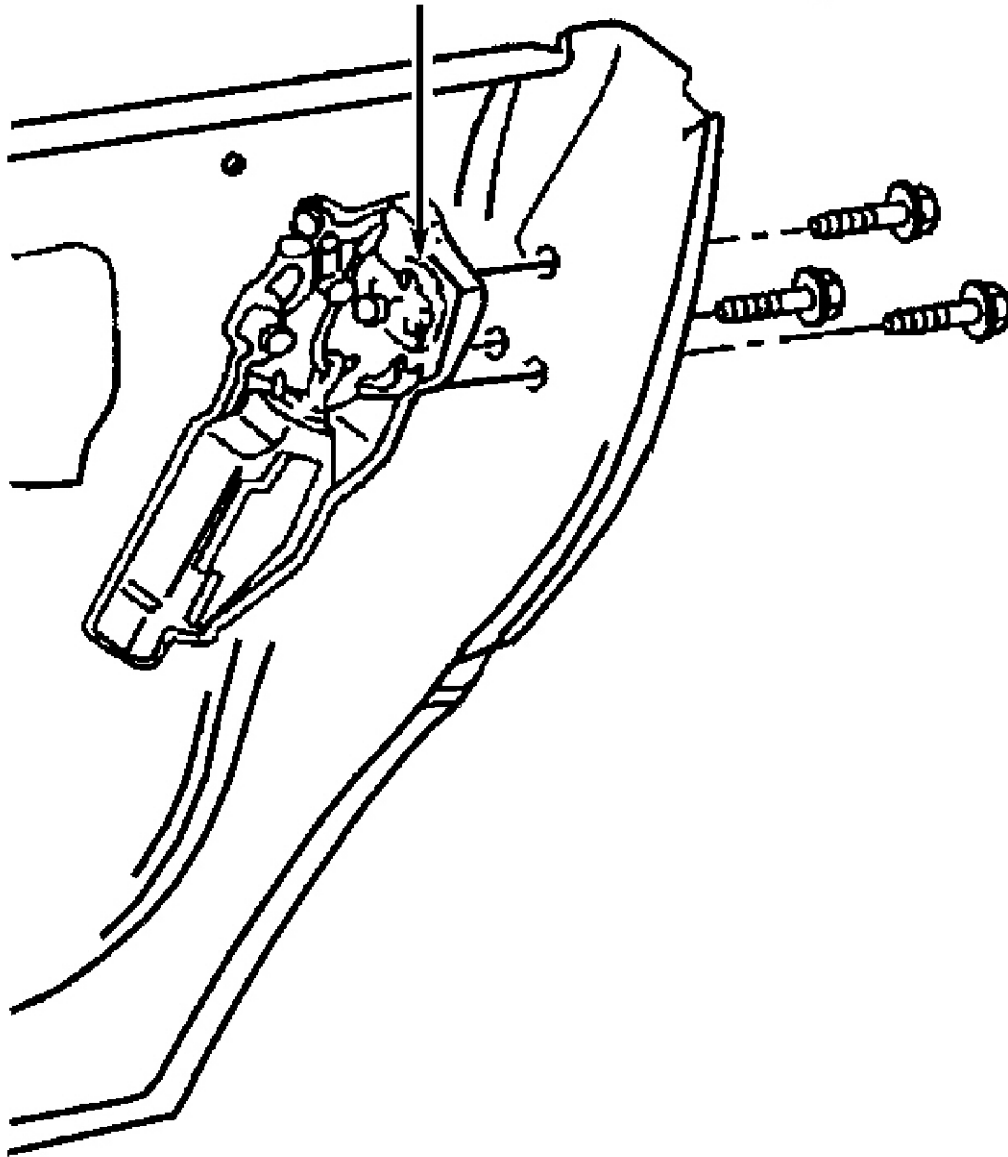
Exploded View Of Front Door Actuator & Latch Assembly
